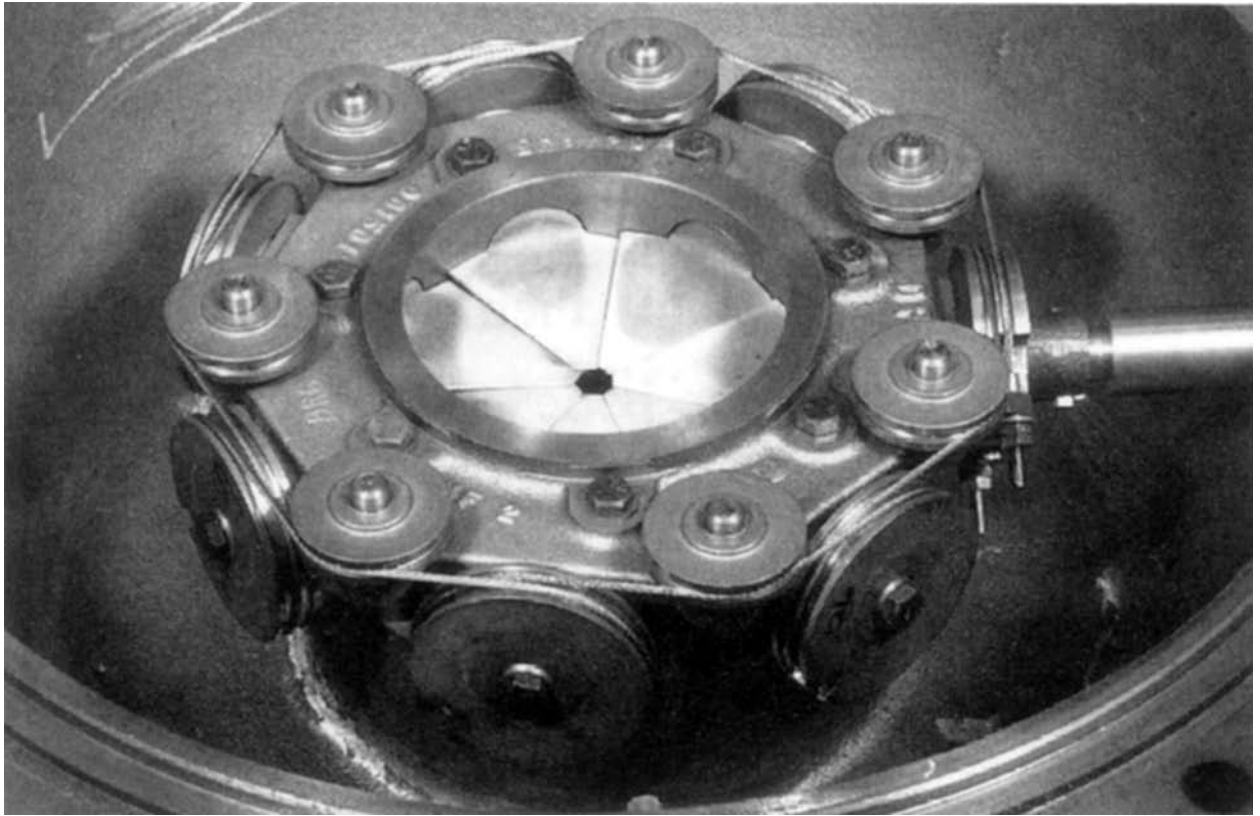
Inspecting Vanes, Pulleys, and Cable
